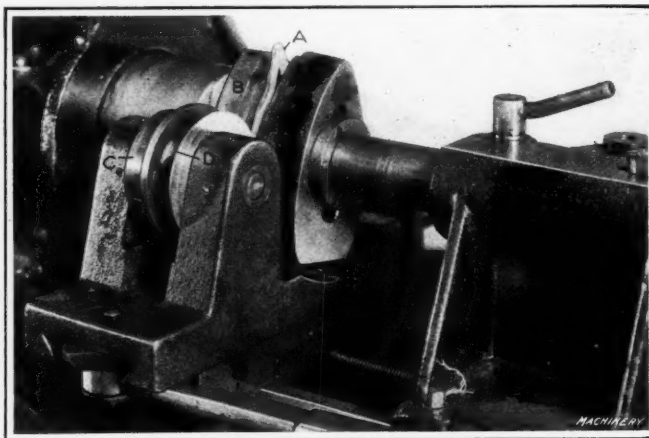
Trimming Flanges from Flat Iron Clamp Covers
